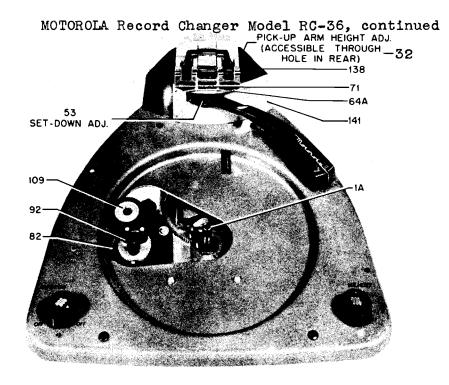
TOP VIEW OF RECORD CHANGER WITH TURNTABLE REMOVED
